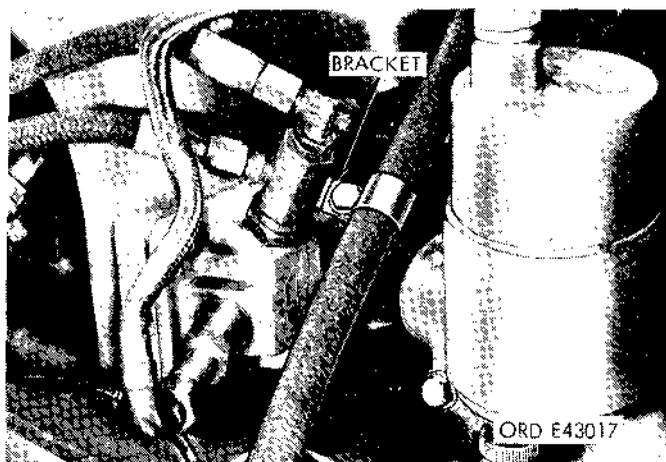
Disconnecting lubrication line bracket at manifold heater housing—diesel.
